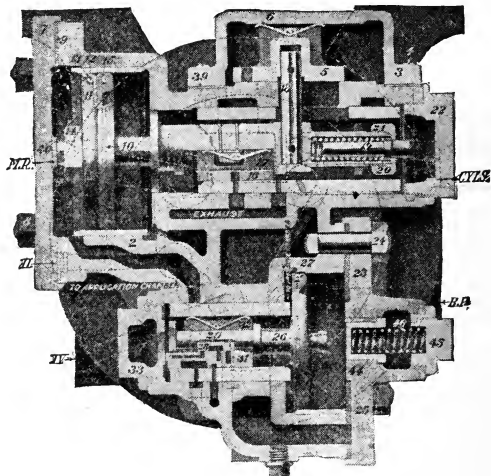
,980.—Westinghouse No. 6 distributing valve. *Connections:* M R, main reservoir pipe; IV, distributing valve release pipe; 11, application cylinder pipe; CYLS, brake cylinder pipe; B P, brake pipe. *Parts:* 2, body; 3, application valve cover; 4, cover screw; 5, application valve; 6, application valve spring; 7, application cylinder cover; 8, cylinder cover bolt and nut; 9, cylinder cover gasket; 10, application piston; 11, piston follower; 12, packing leather expander; 13, packing leather; 14, application piston nut; 15, application piston packing ring; 16, exhaust valve; 17, exhaust valve spring; 18, application valve pin; 19, application piston graduating stem; 20, application piston graduating spring; 21, graduating stem nut; 22, upper cap nut; 23, equalizing cylinder cap; 24, cylinder cap bolt and nut; 25, cylinder cap gasket; 26, equalizing piston; 27, equalizing piston ring; 28, graduating valve; 29, graduating valve spring; 31, equalizing valve; 32, equalizing valve spring; 33, lower cap nut; 34, safety valve; 35, double chamber reservoir; 36, reservoir stud and nut; 37, reservoir drain plug; 39, application valve cover gasket; 40, application piston cotter; 41, distributing valve gasket (located where distributing valve bolts to reservoir, not shown); 42, oil plug; 43, safety valve air strainer; 44, equalizing piston graduating sleeve; 45, equalizing piston graduating spring nut; 46, equalizing piston graduating spring.
